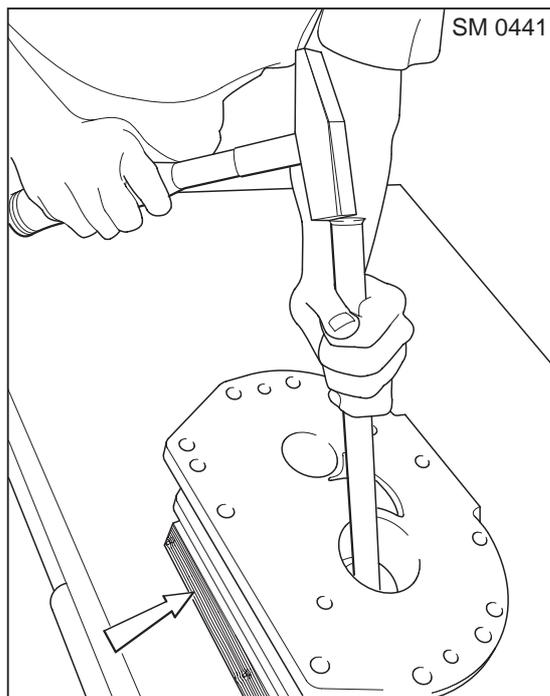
Driving Out Cylindrical Roller Bearings
